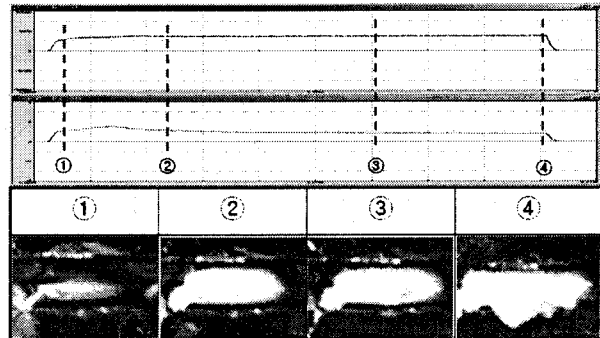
Inverter DC, Welding time : 8cycle
